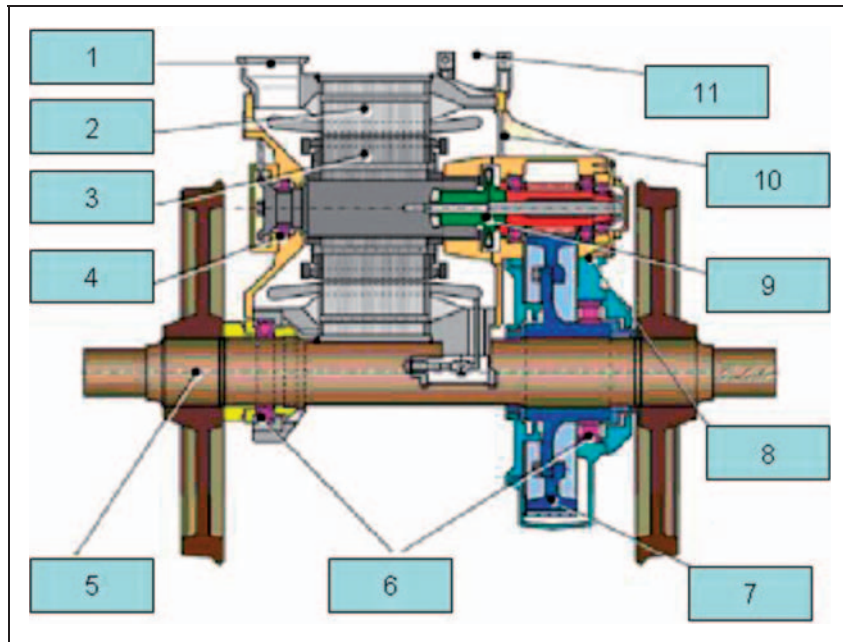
The axle-mounted drive system. 1 - air inlet; 2 - stator; 3 - rotor; 4 - motor bearing; 5 - shaft; 6 - bearing; 7 - large gear; 8 - interface; 9 - coupling; 10 - air outlet; 11 - suspension.
